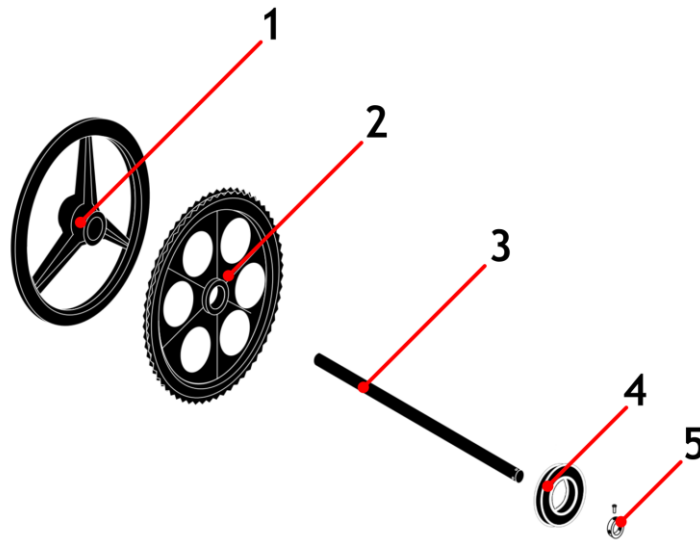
Components of the working section of the MCB SWING cultivator roller (1 - Smooth wheel, 2 - Toothed wheel, 3 - Roller shaft, 4 - Disc spring, 5 - Retaining ring)
